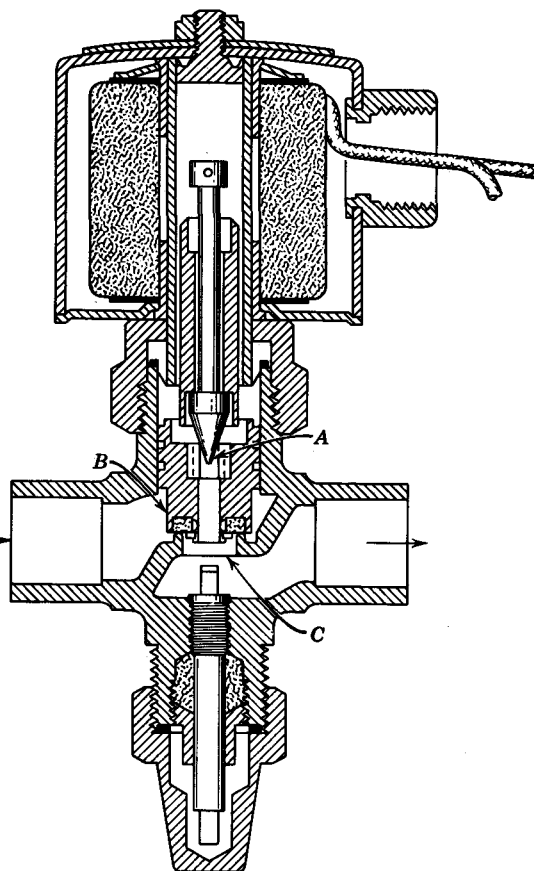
Pilot-operated solenoid valve of the floating piston type. (Courtesy Sporlan Valve Company.)
